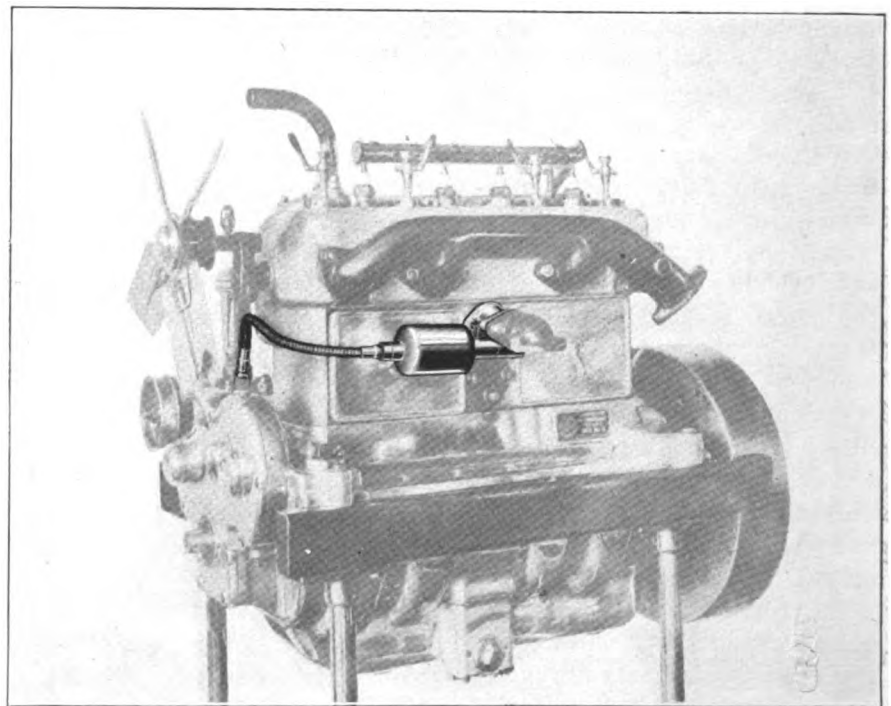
Pierce Centrifugal Motor Governor as Installed on the Engine to Drive from the Camshaft.
